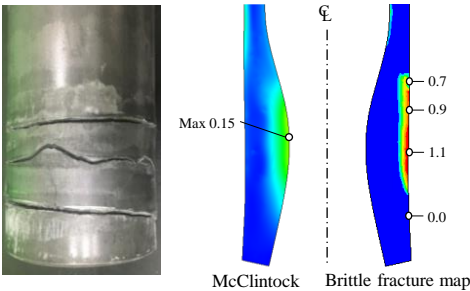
Brittle fracture of forgeable materials during cold shell nosing process.
